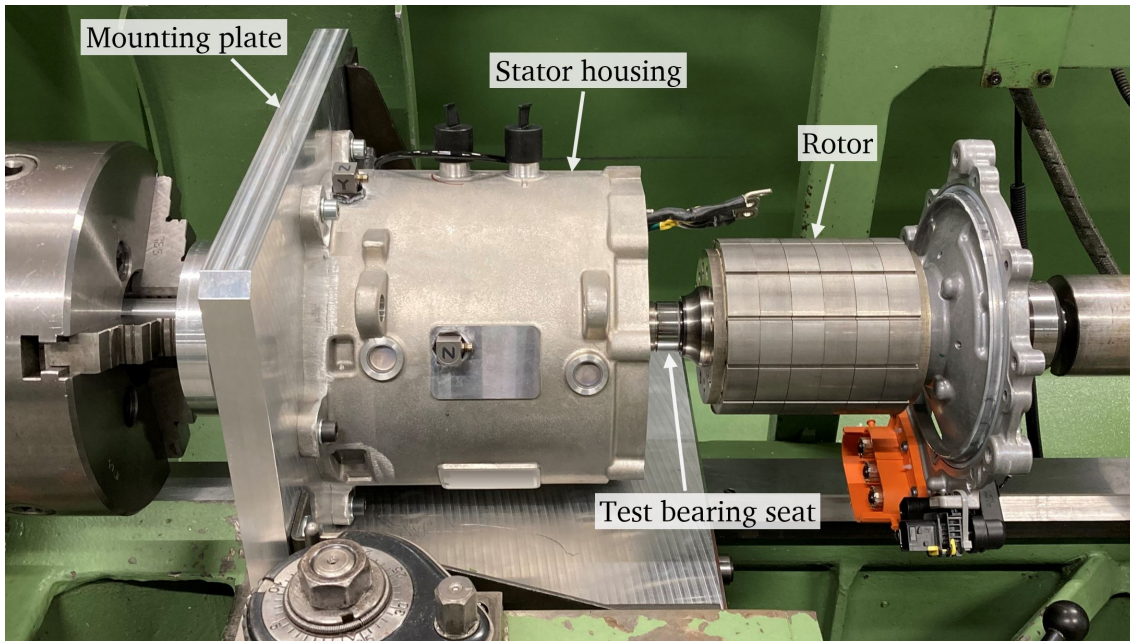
Picture of the PMSM at a modified lathe during bearing replacement.
